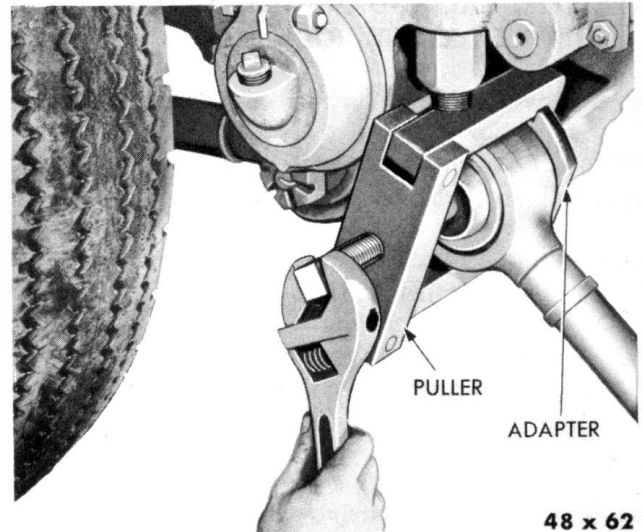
Removing Lower Torque Rod from Trunnion Bracket—Puller DD-1090
